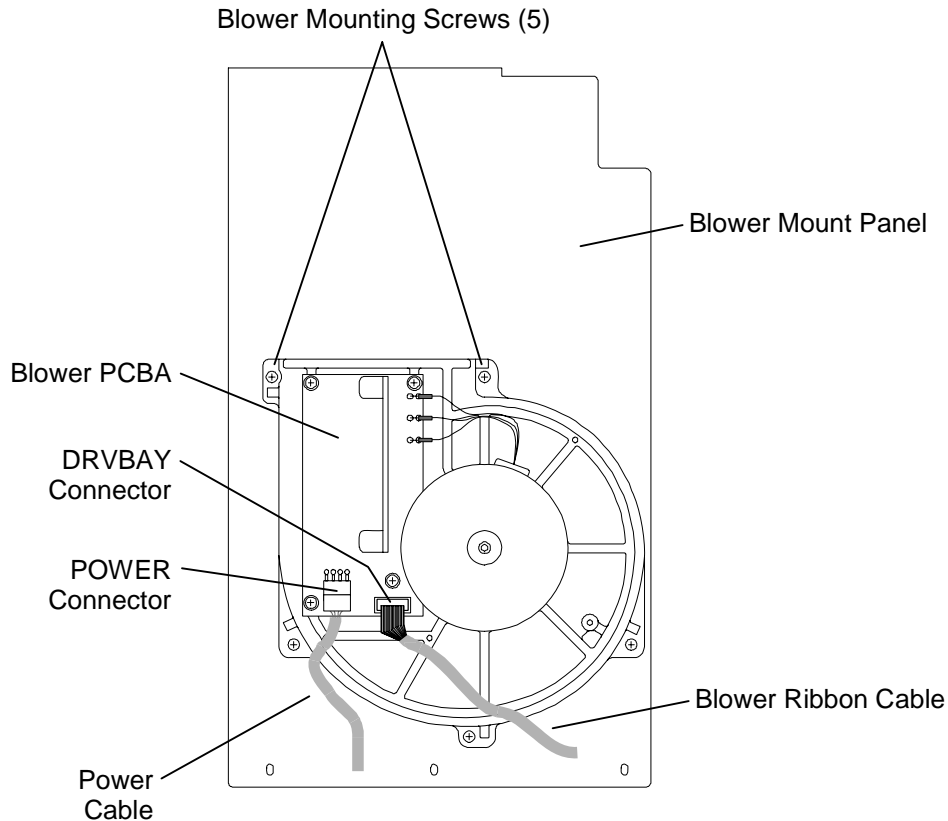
Blower Assembly Attached to the Blower Mount Panel
